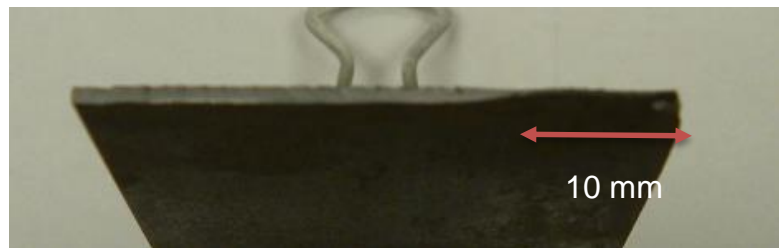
Photo of fracture surface of sample F13 (70%)
